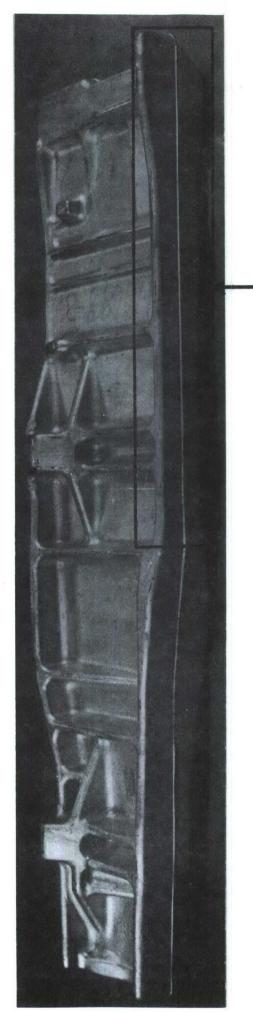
7049-T73 AND 7175-T736 DIE FORGING
